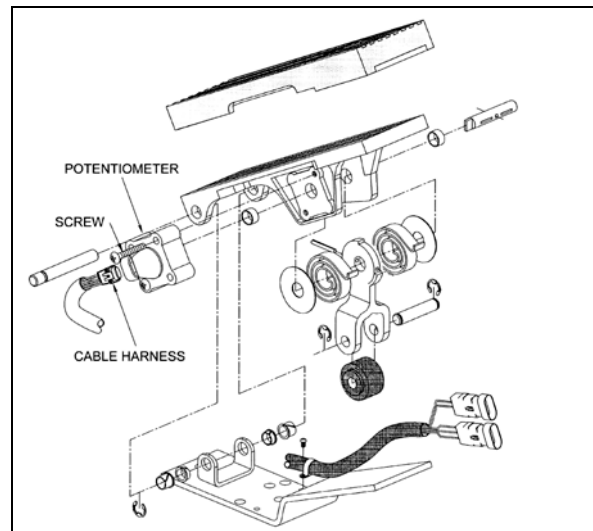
ELECTRONIC FOOT PEDAL ASSEMBLY⁰³⁰³⁵
